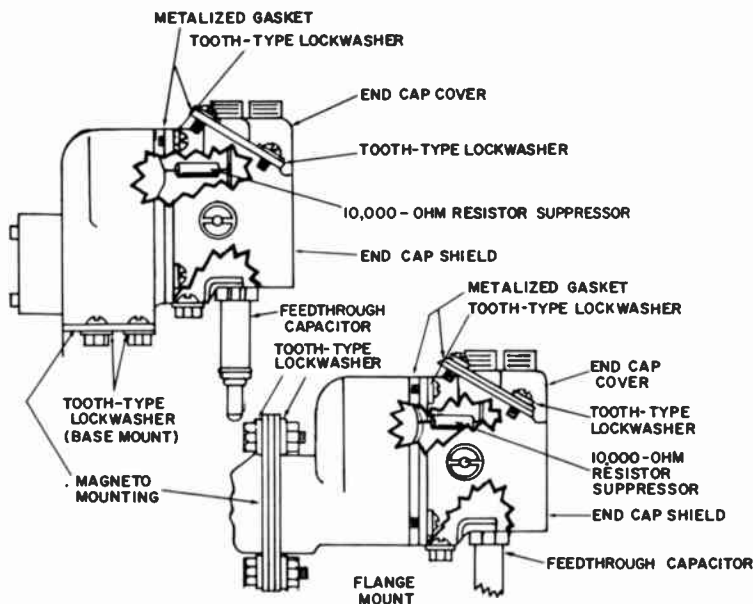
Integrally suppressed shielded magneto with feedthrough capacitor to ignition-switch lead.
